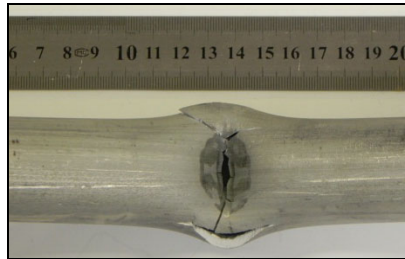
Fracture underneath the indenter for the 7075T6 tube in quasi-static three-point bending test.
